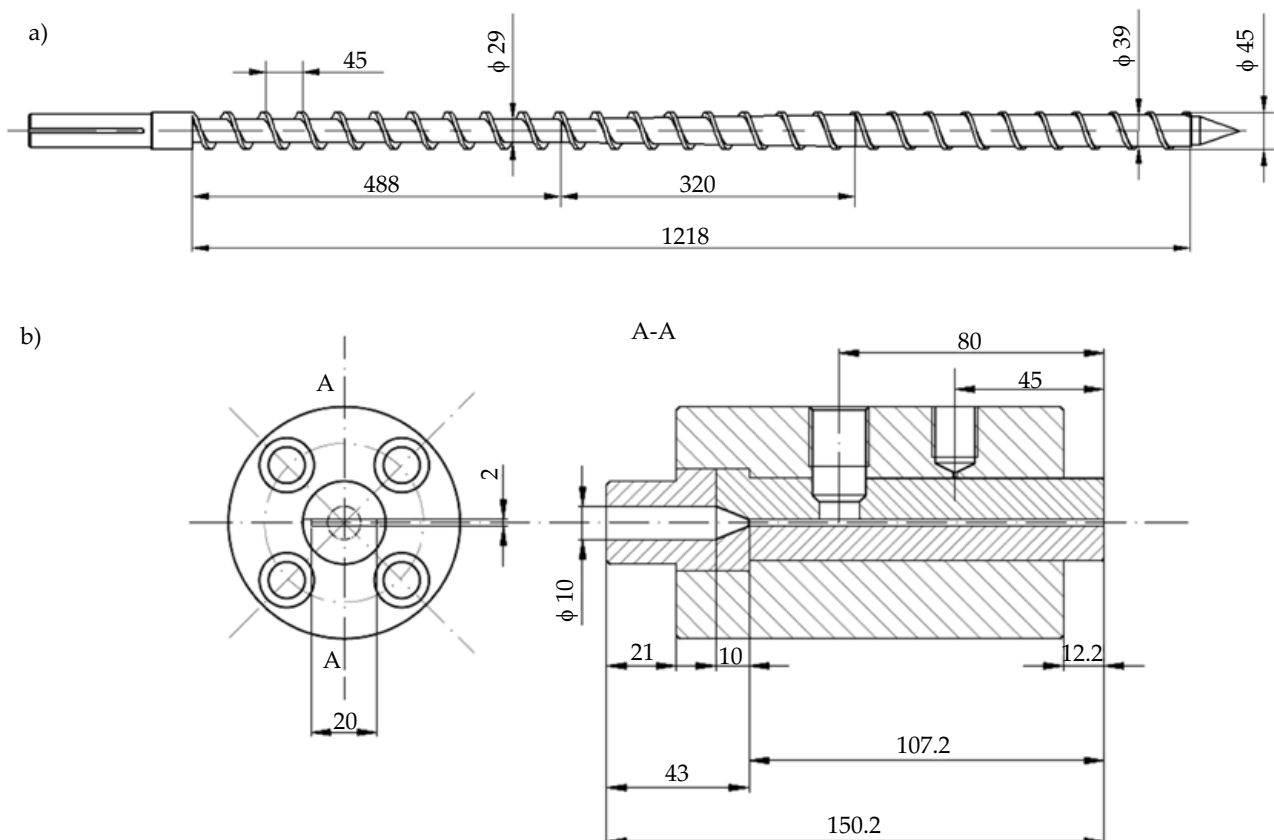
Geometry of the screw and the die: a) screw, b) forming mouthpiece
